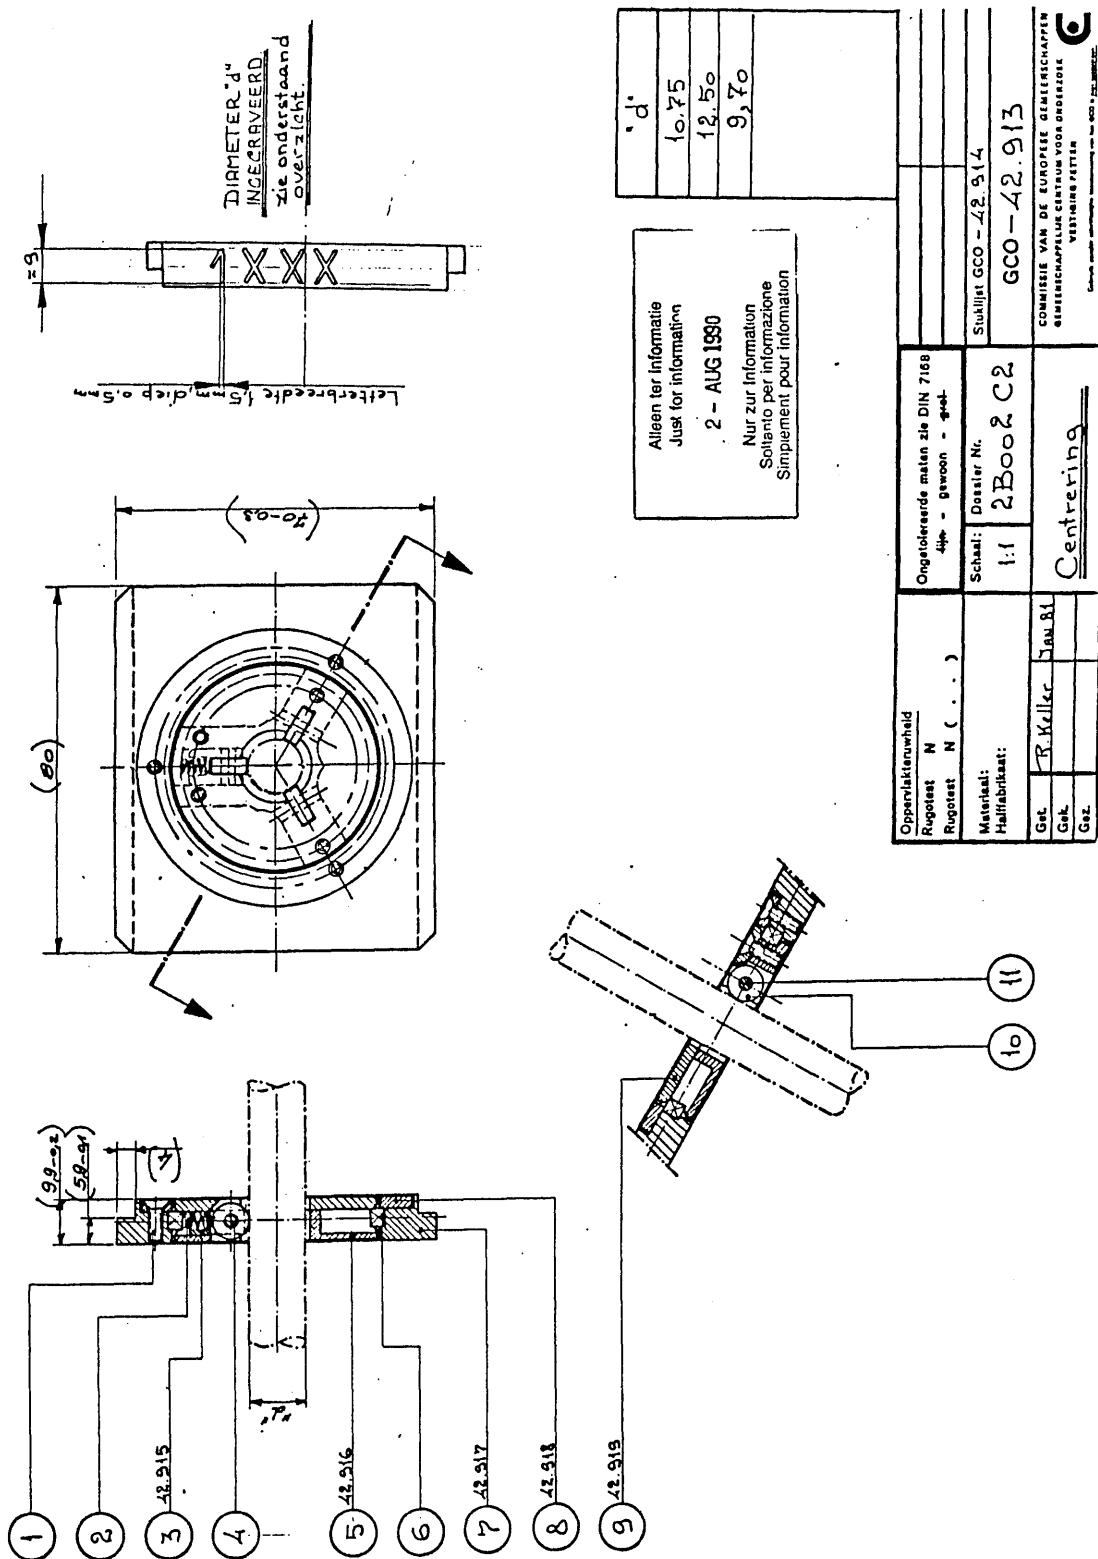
Assembly Drawing Of Centralising Cassette.
